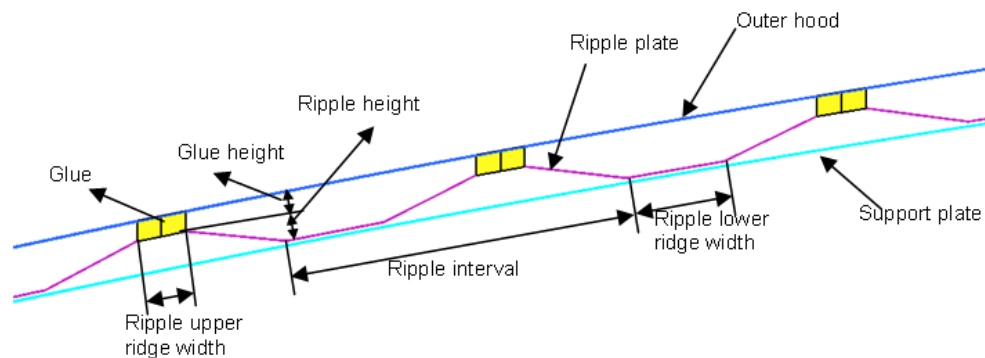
Enlarged sectional view of sandwich hood assembly (Liu et al., 2009)
